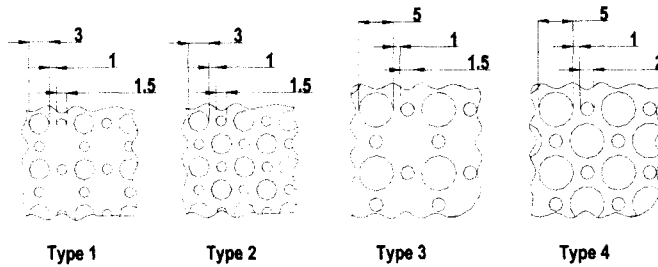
Four kind of hole arrangement of prototype cylindrical multi-hole burners
